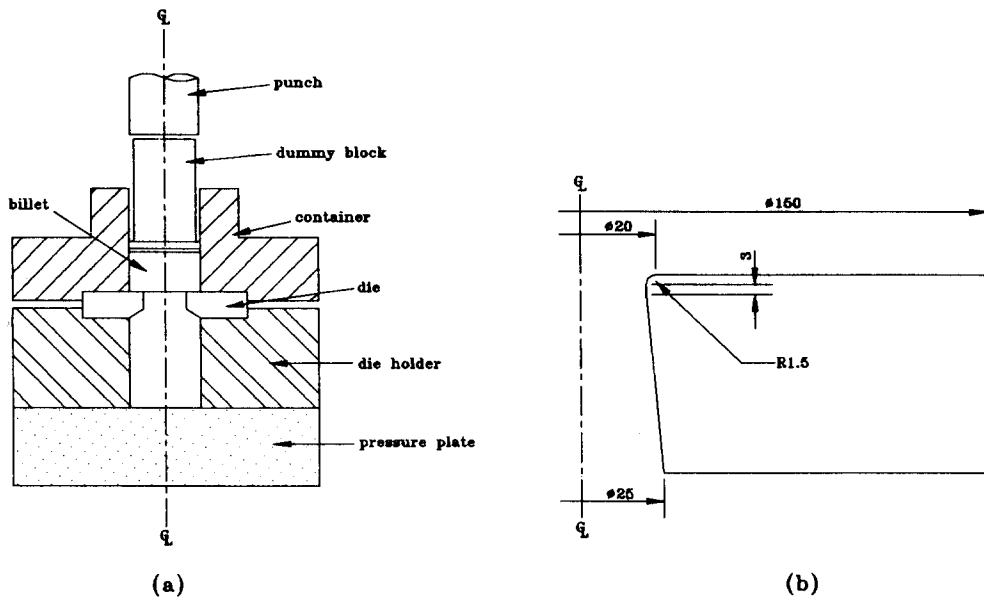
Schematic view of (a) experimental apparatus and (b) shape of die for axisymmetric extrusion
